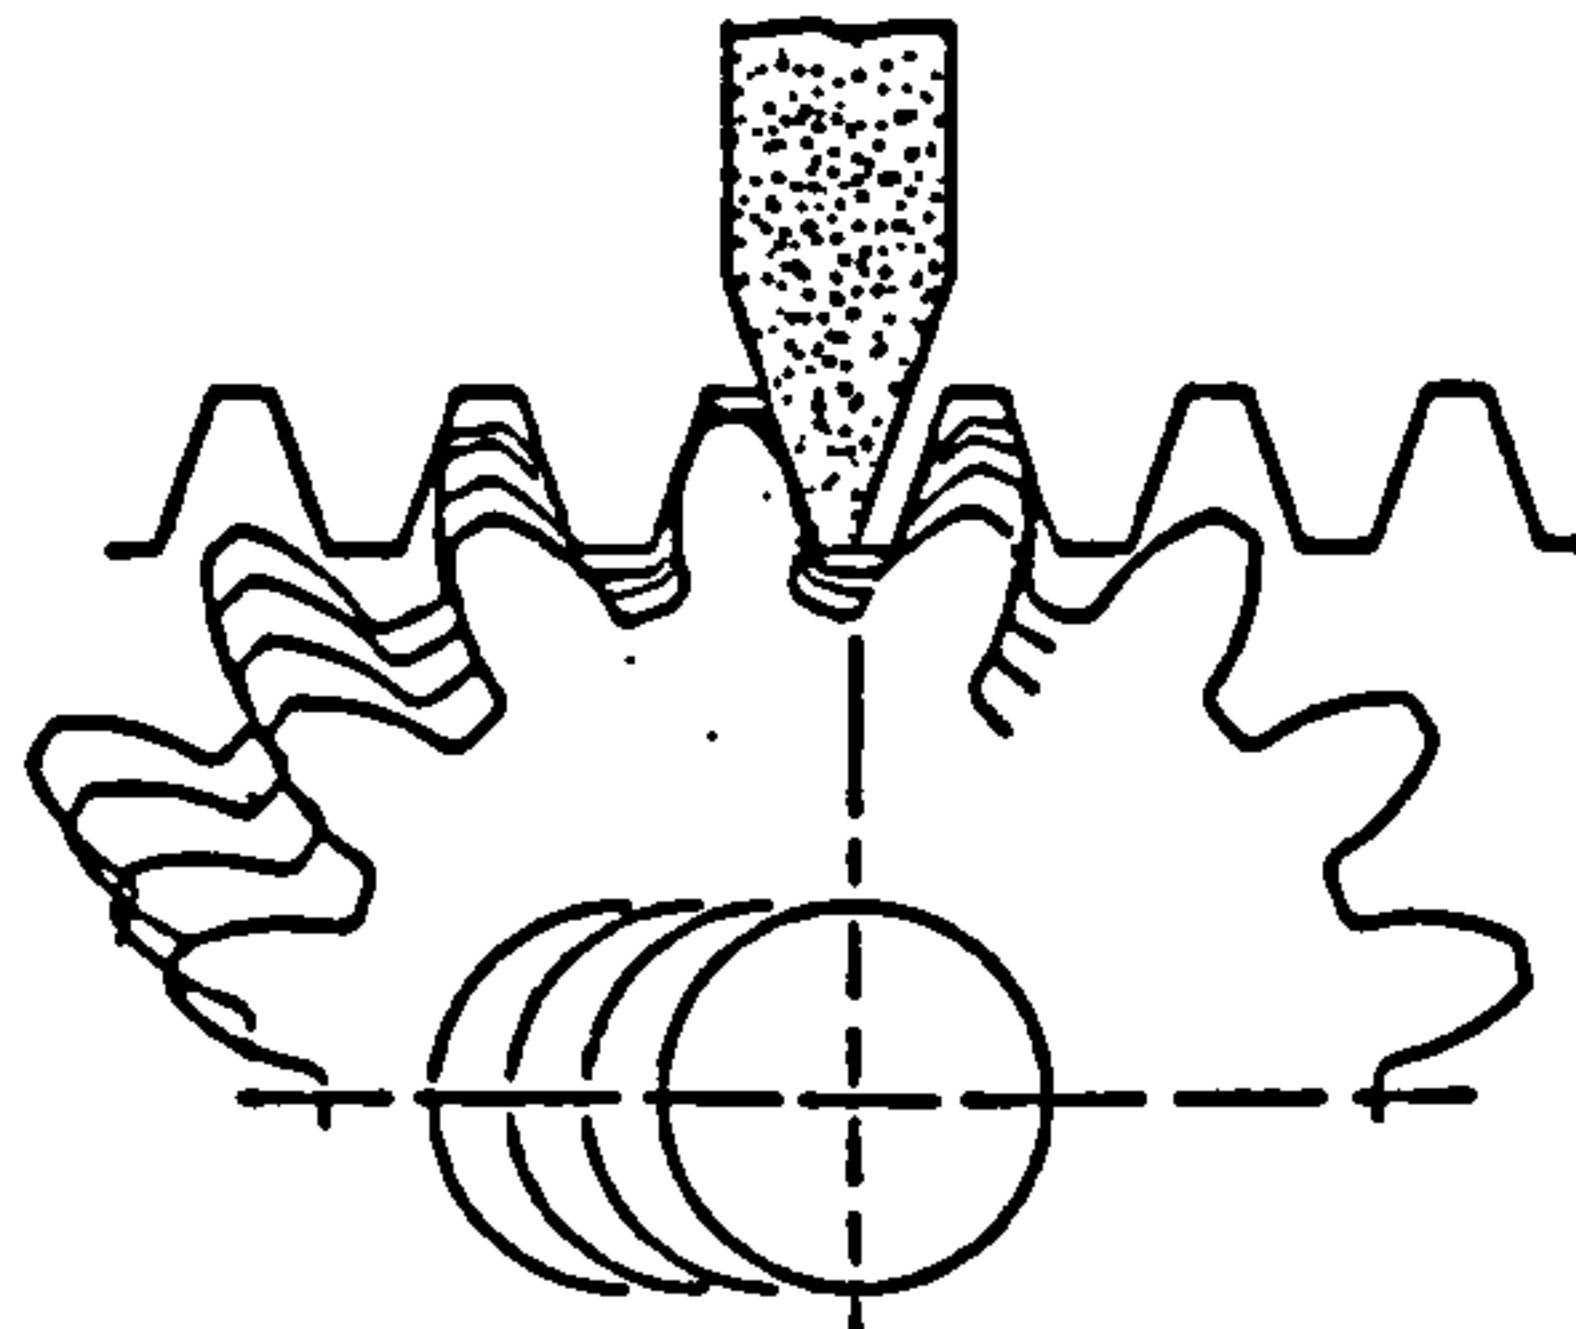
Single conical wheel grinding (Höfler & Niles).
